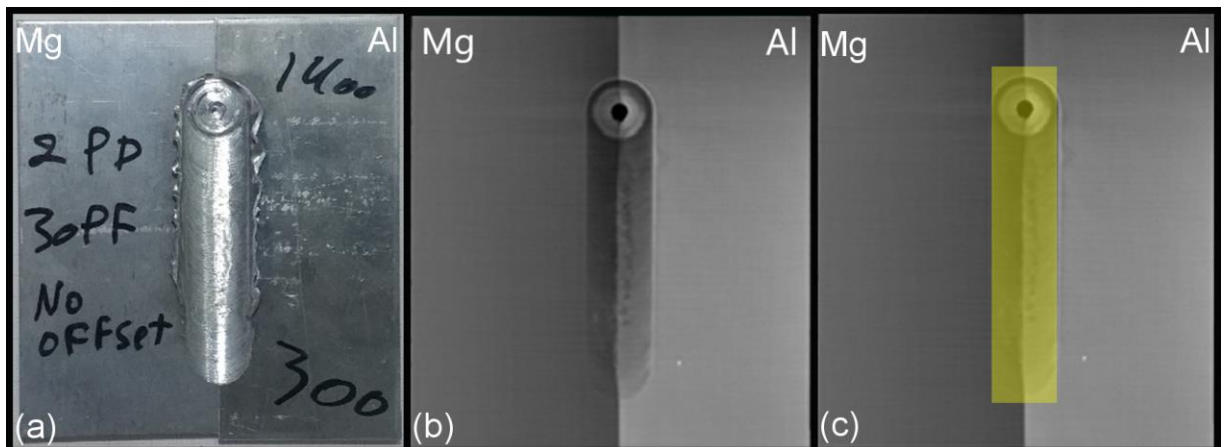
Weld sample (f), (a) top view photograph of the weld, (b) top view CT image of the weld, (c) top view CT image of the weld sample shown in yellow is the location of the application of the Otsu thresholding
